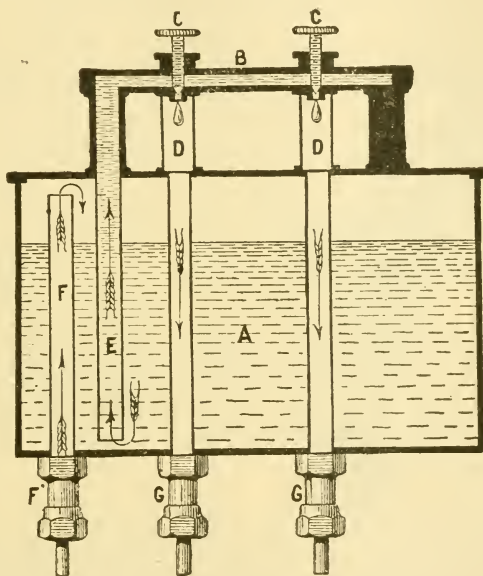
Typical force feed lubricator, operating by air or gas pressure instead of a pump. The parts are: A, oil reservoir; B, distributing pipe; C, C, valve screws for regulating flow of oil to parts, through leaders, D and D; E, standpipe through which oil is forced by air pressure; F, standpipe admitting air or exhaust gases under pressure; F', union for pipe from crank case; G, G, unions for pipes to various parts of the machinery.
